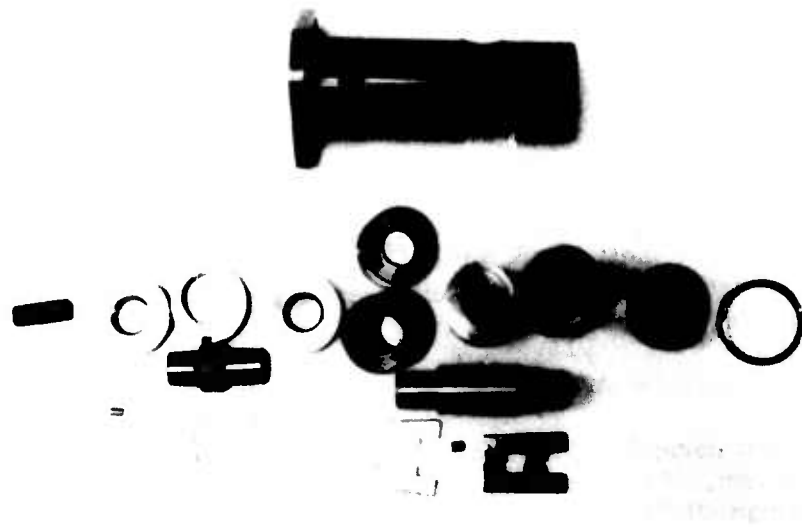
Oil Pump Components Before 50-hr of Endurance Testing at 250°F
